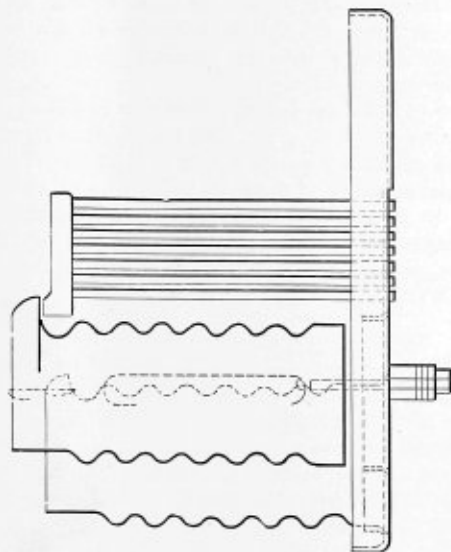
NEW FURNACE BEING DRAWN INTO END PLATE.
